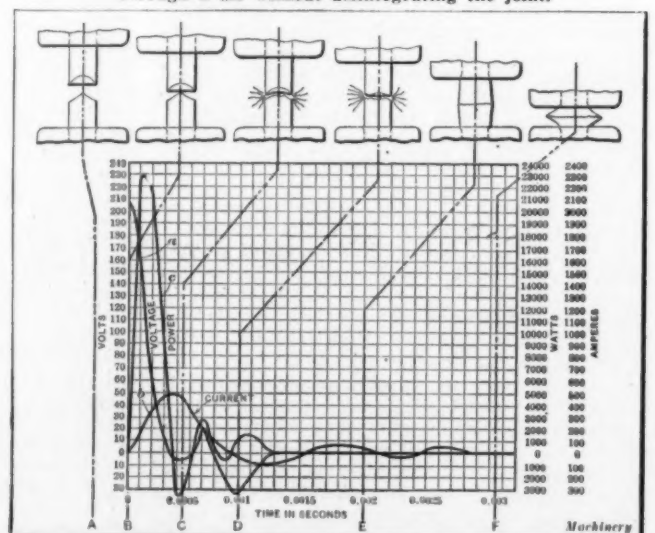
Oscillogram chart illustrating power consumed and time taken for making electric welds by percussive welding.
